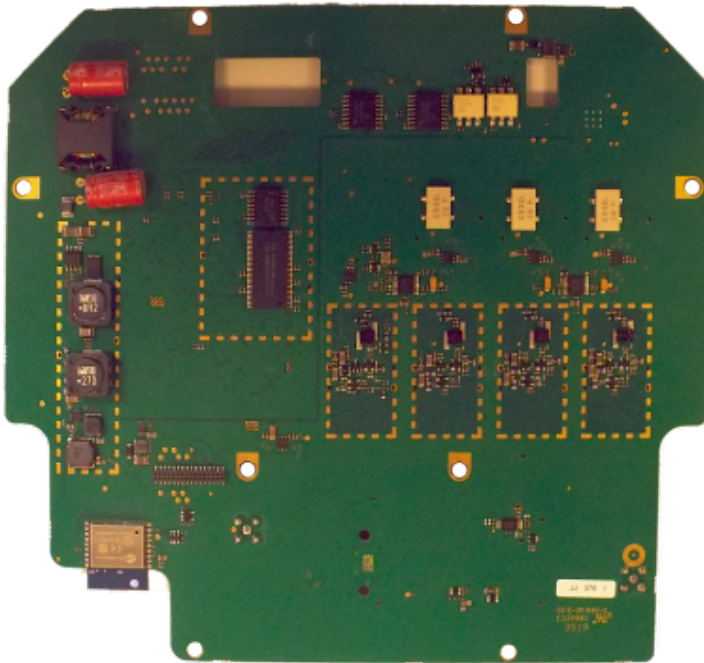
ATA100 Main PCB – Top side, screening cans removed
